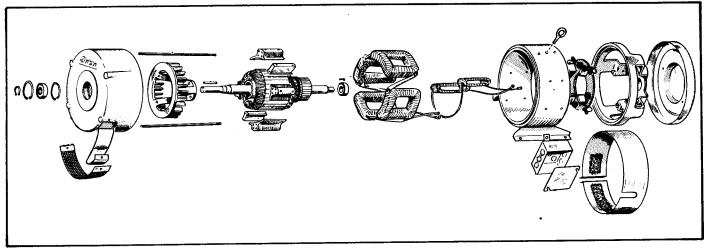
4 POLE, TWO BEARING SEPARATE GENERATOR
